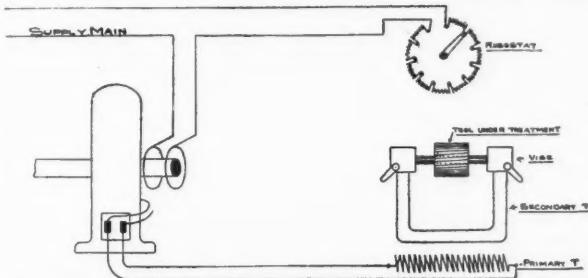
Apparatus for Tempering Milling Cutters, etc., Electrically.
